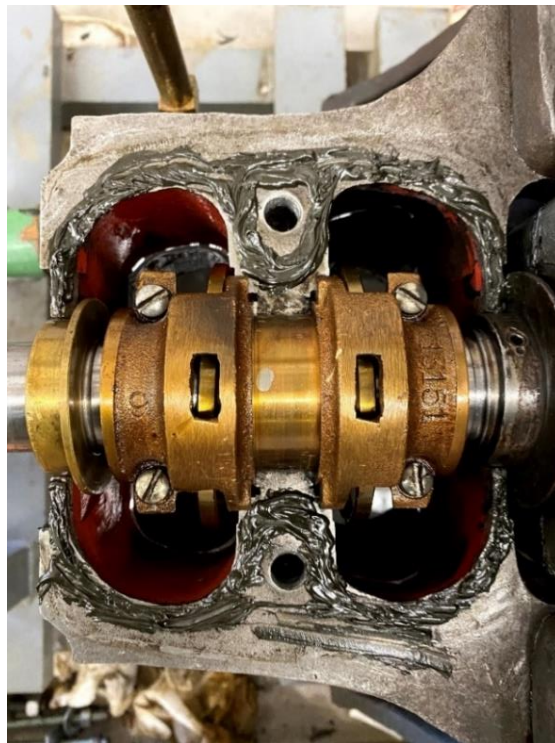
Permatex #2 sealant applied on the bottom part of the oil well cover - pump side.
